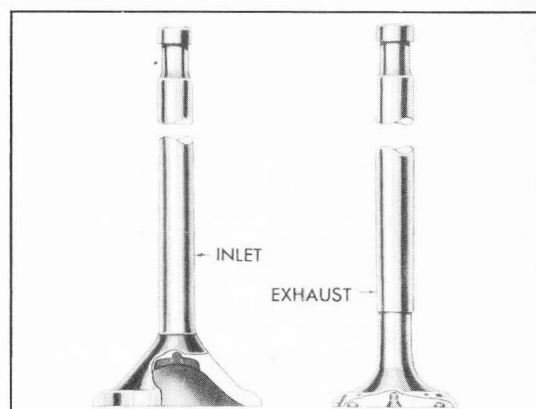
Inlet and Exhaust Valves—Sectional View
